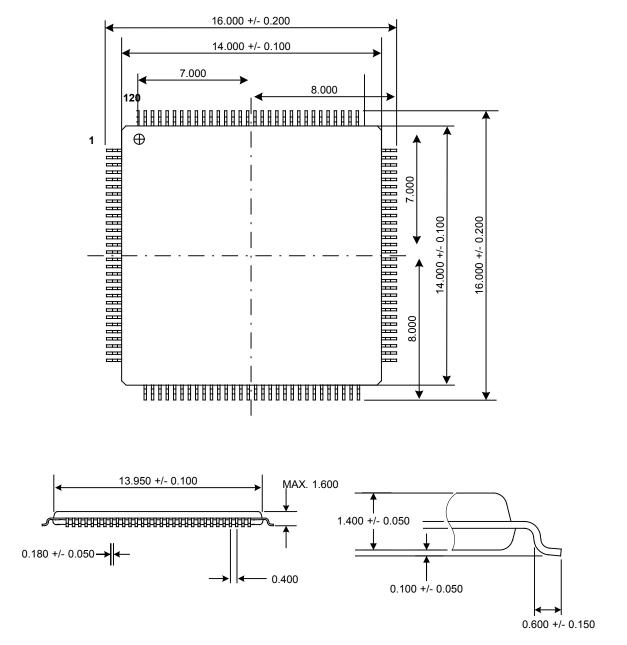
71M6534/6534H 120-Pin LQFP Package Outline
